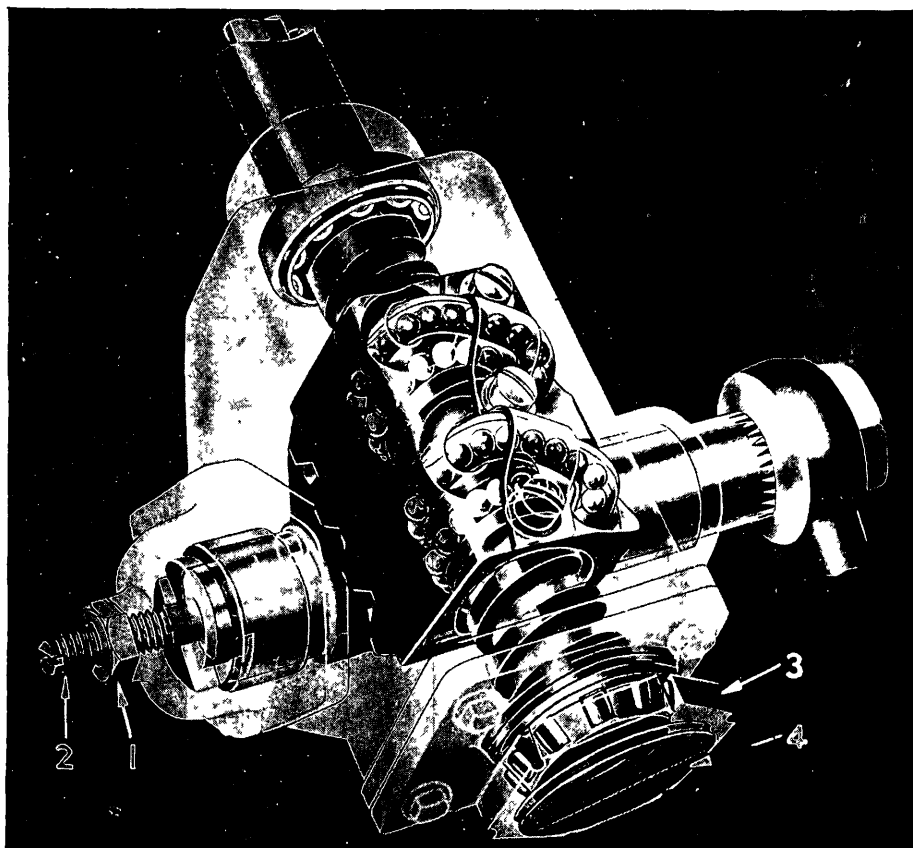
Phantom view of Saginaw recirculating ball and nut gear
